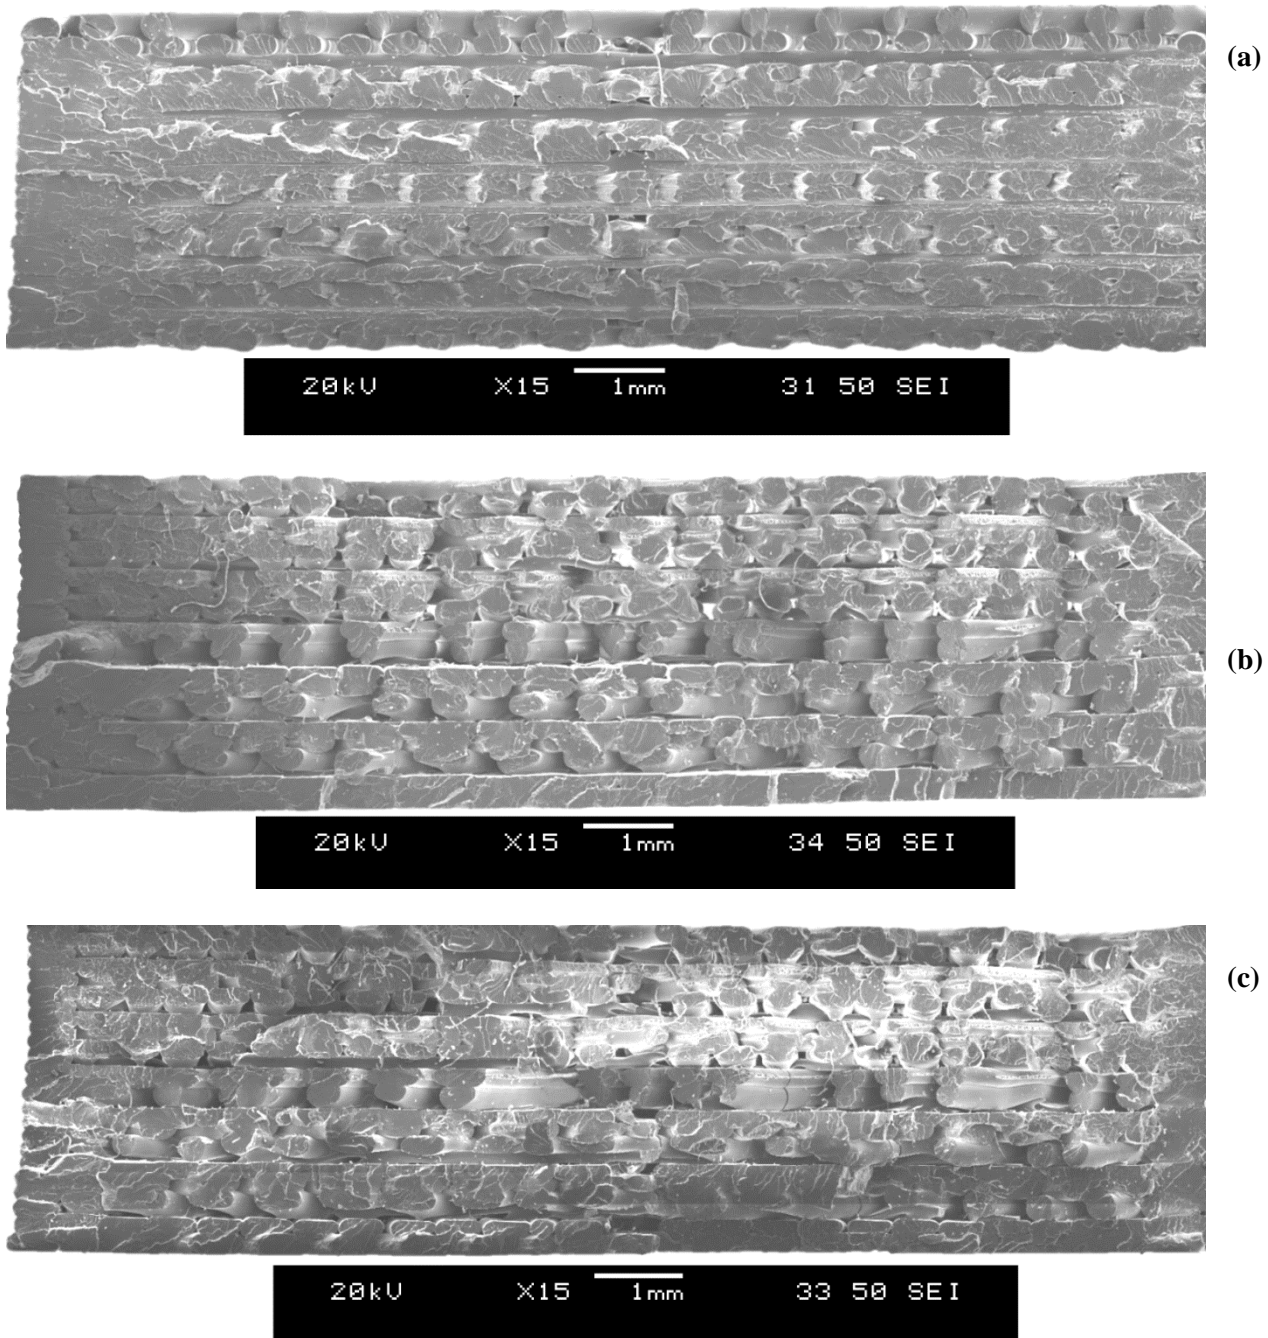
SEM imaging of fracture surface of specimens with defects: (a) specimen D; (b) specimen E; (c) specimen F.
